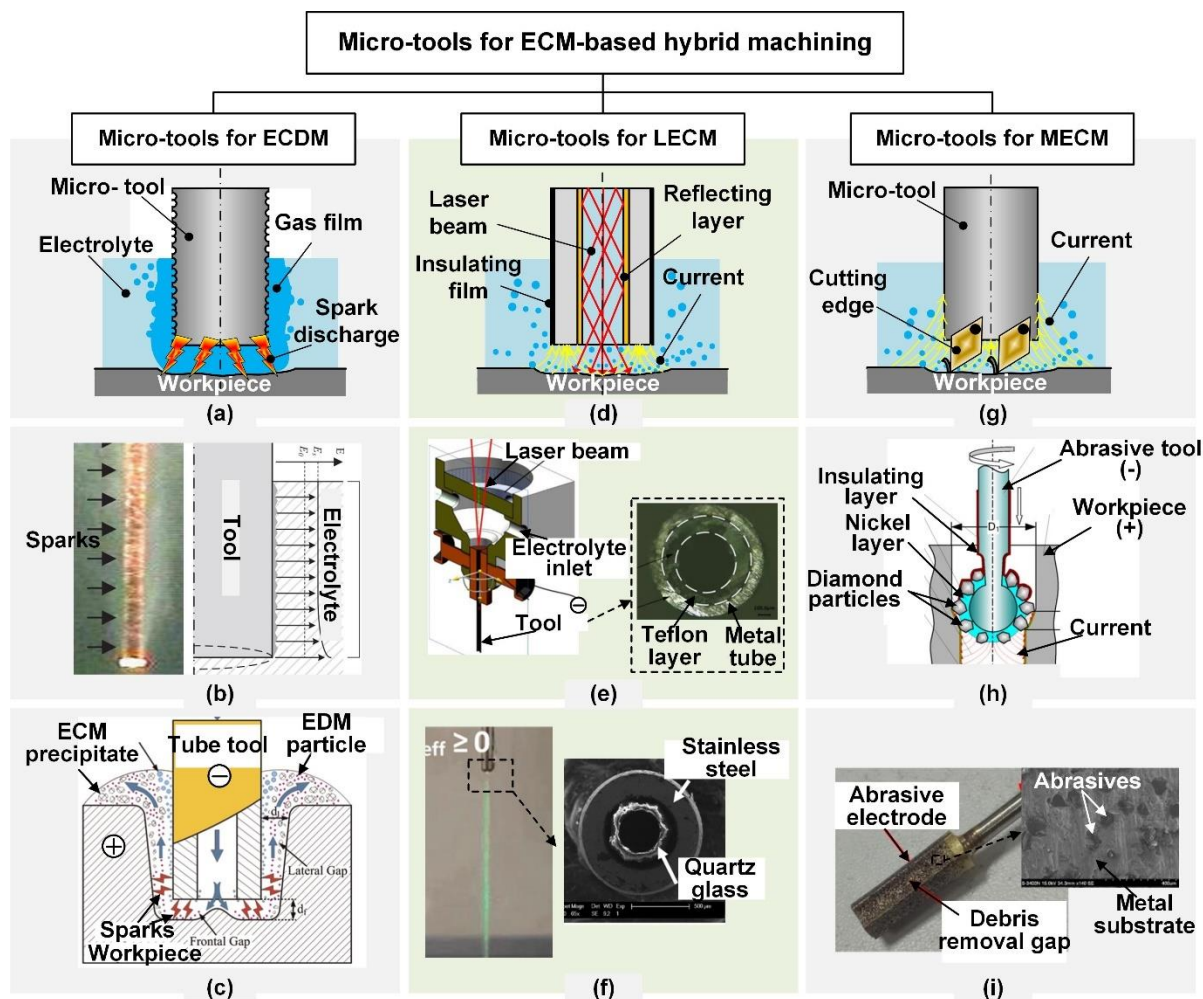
Micro-tools for ECM-based hybrid machining: (a) Schematic diagram of the ECDM process; (b) Micro-tool with surface bumps (Han et al., 2017); (c) Diagram of the tube-tool electrochemical discharge drilling process (Zhang et al., 2016b); (d) Schematic diagram of the L-ECM process; (e) Micro-tool with laser reflector (Wang and Zhang, 2021); (f) Micro-tool with quartz capillary and inner reflective layer (Saxena et al., 2020c); (g) Schematic diagram of the M-CDM process; (h) Tool for hybrid electrochemical grinding (Zhu et al., 2011); (i) Micro-tool for hybrid electrochemical discharge grinding (Liu et al., 2020d).
